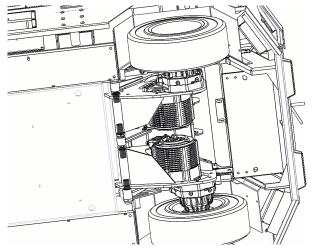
Rear Axle Igus Bushings Inspection.
